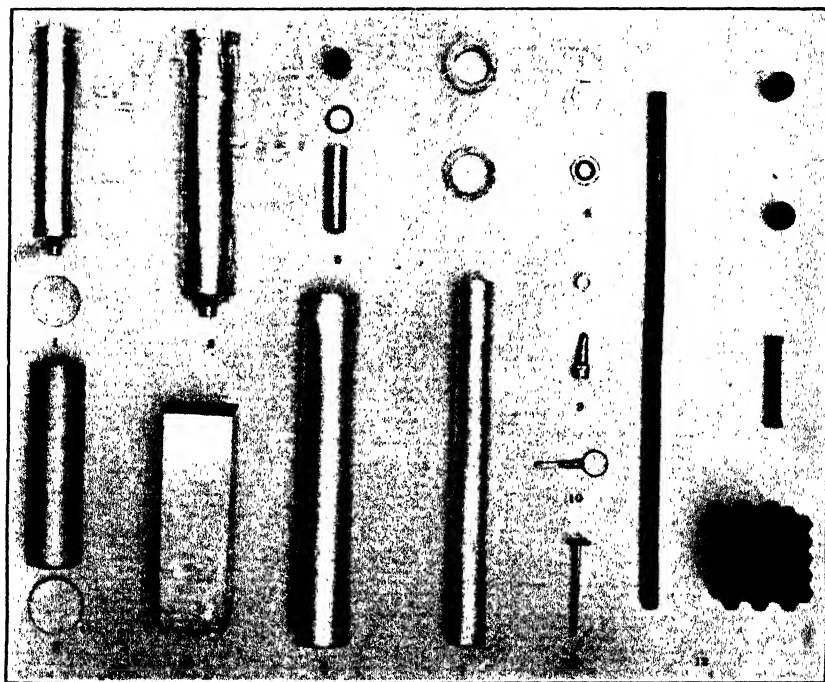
A collection of extruded shapes in tin, lead, zinc, aluminum, brass and copper, showing also some of the blanks or cups.
